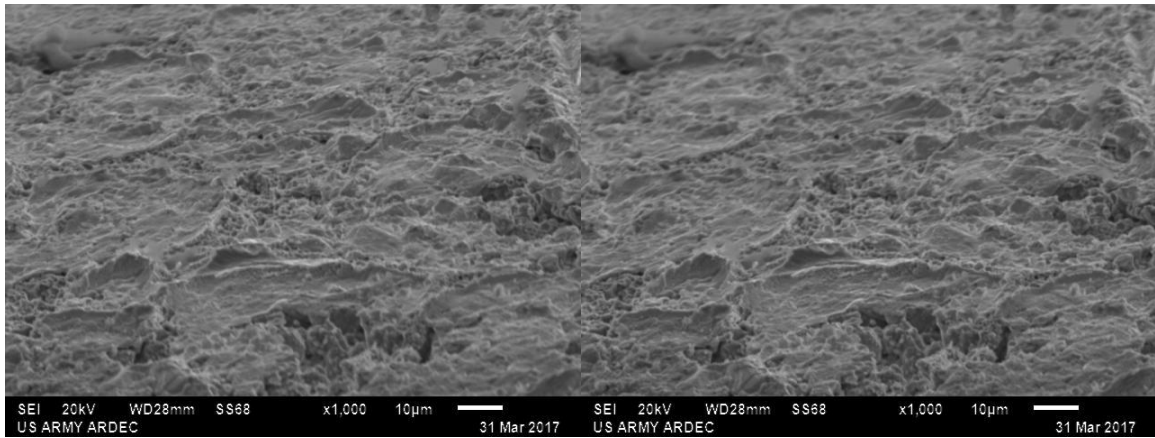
Impact Specimen 4 D2 Side Bottom Right Lip x1000
